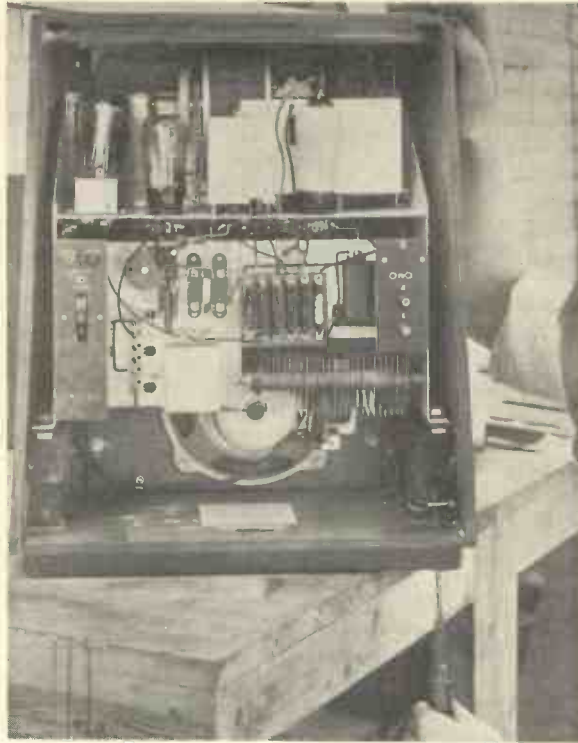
REMOVING THE CHASSIS BOLTS OF THE "G" RECEIVER.
